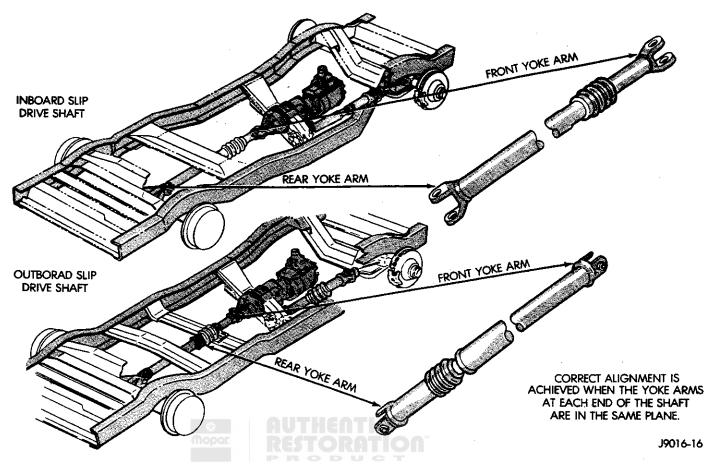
Drive Shaft Yoke Arm Bores Aligned In Same Plane
